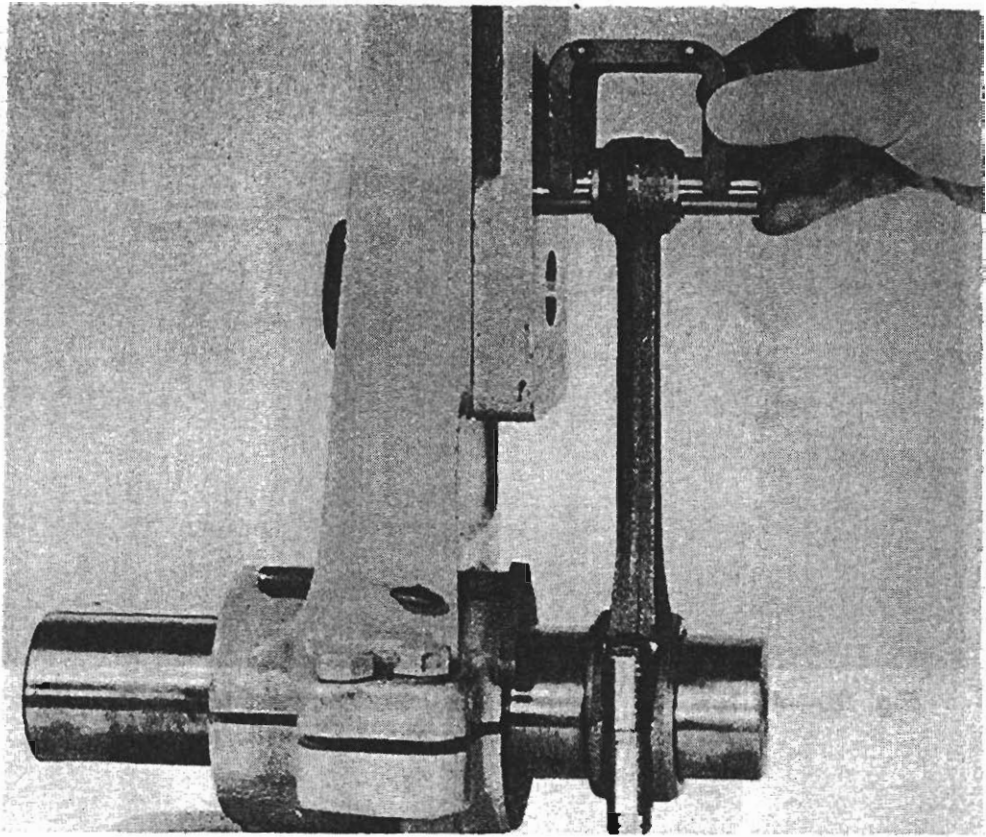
Using the Connecting Rod Aligning Jig J-874-PA to Check Rod Alignment.
